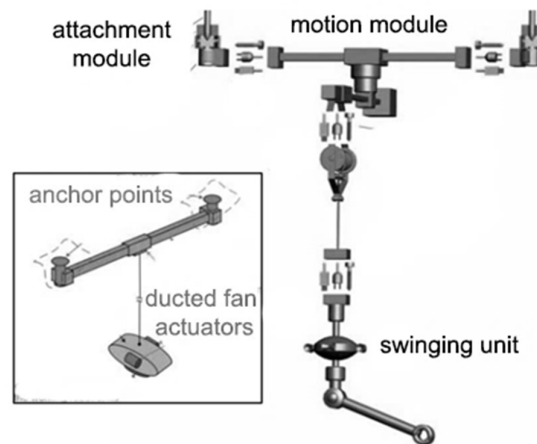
The Acroboter cable hanging robot's several components [38].
